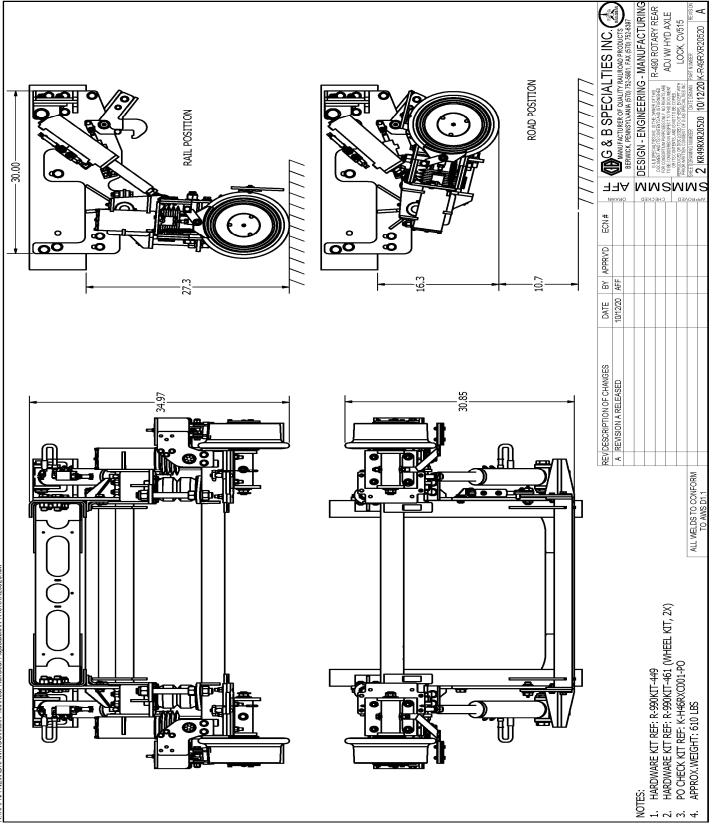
K-R49RXR20520 Sheet 2 (R-490 Rotary Rear with Hydraulic Lock)
